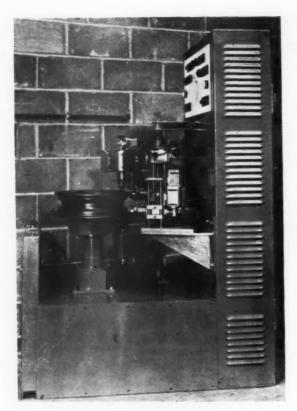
Automatic inspection rig for determining "lift" and "run-out" of car wheels.
